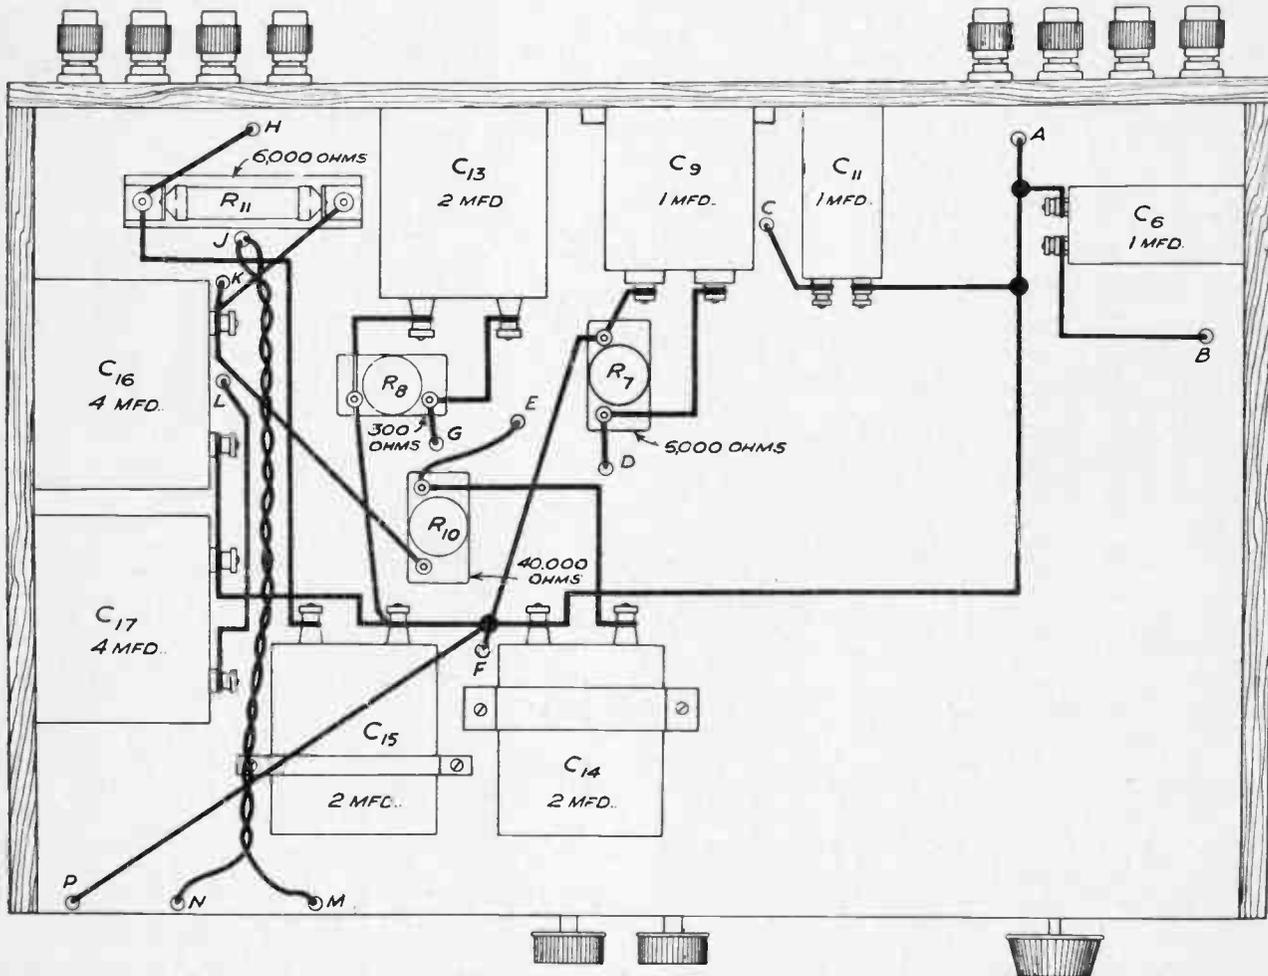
The wiring and component positioning which must be carried out below the baseboard. This diagram will be used in conjunction with Fig. 3.
